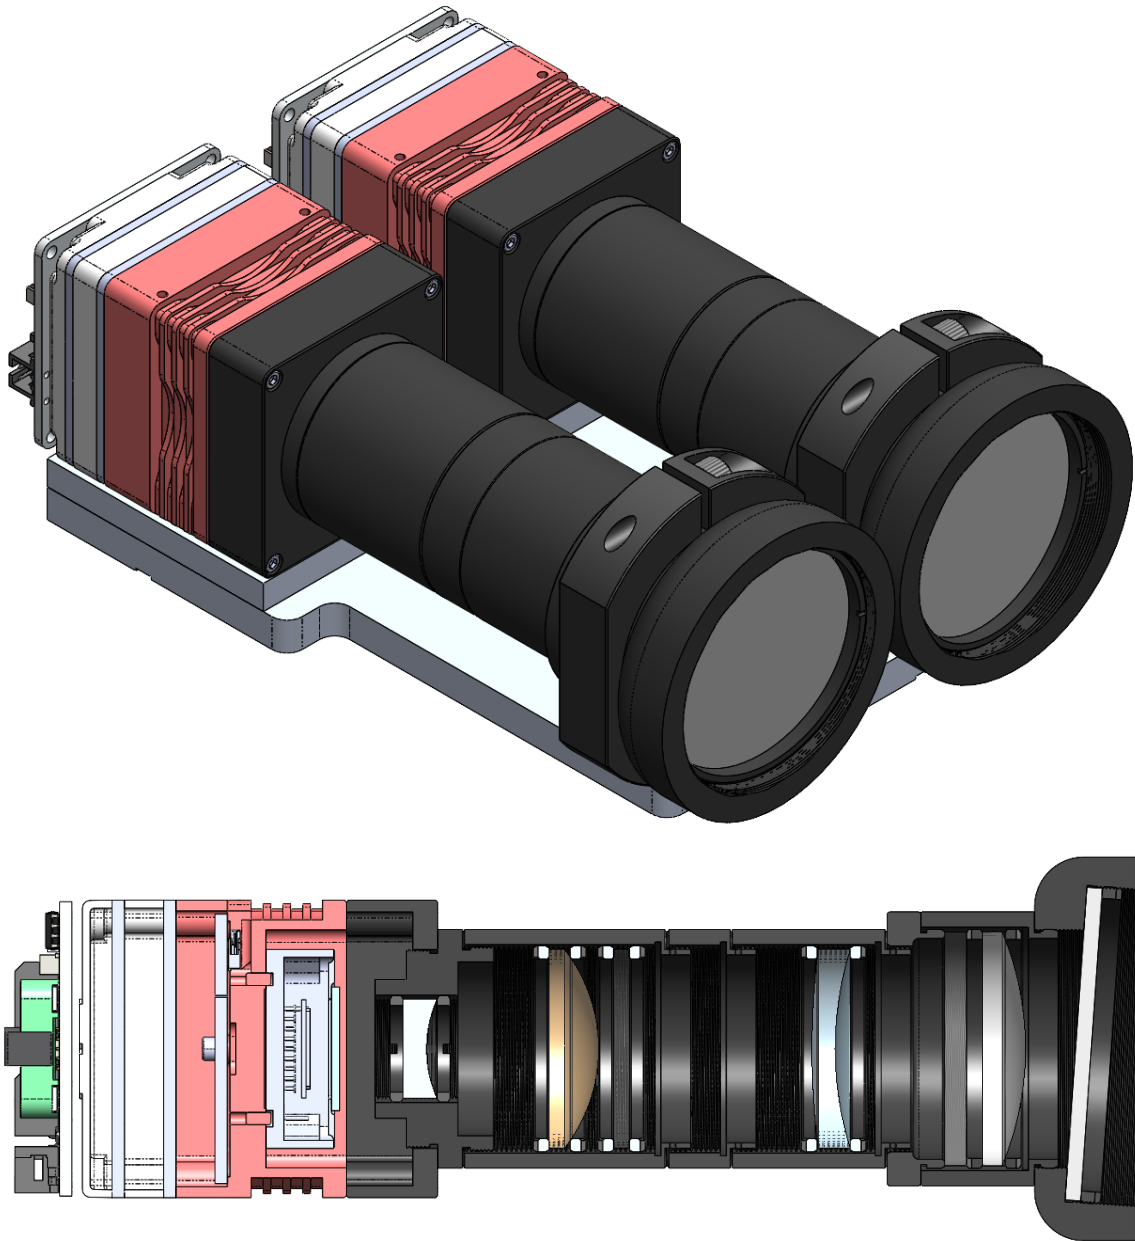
Rev 6 - The L4 Mount is switched from COTS components to a custom piece because the COTS components obstructed the optical path. The interference filter mount is also changed to reduce the number of lens tube components and simplify the mounting method.
